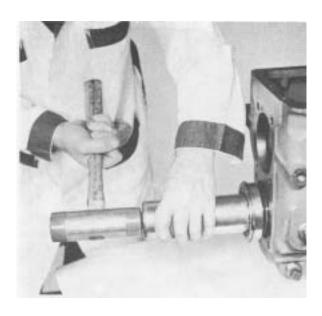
Drive rear bearing on countershaft and rear bearing bore. NOTE: Countershaft drive gear must be supported on each side with a ¼" flat bar to prevent damage to countershaft pilot bearing.
